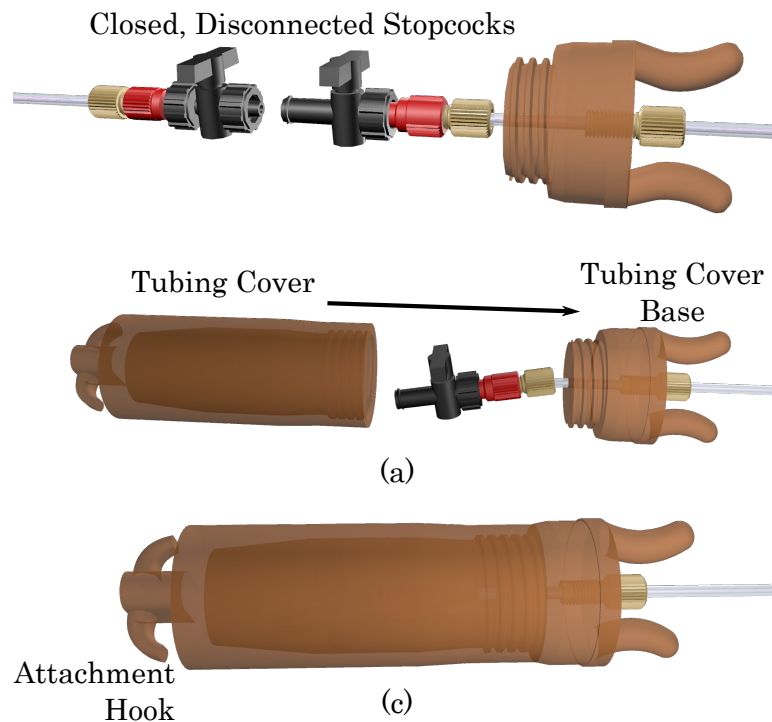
Disconnect Point Cover. (a) Assembly of the cover for the disconnect point. The assembly is done aseptically in a HEPA filtered environment. The tubing cover is sterilized before assembly. (b) Fully assembled tubing cover.
